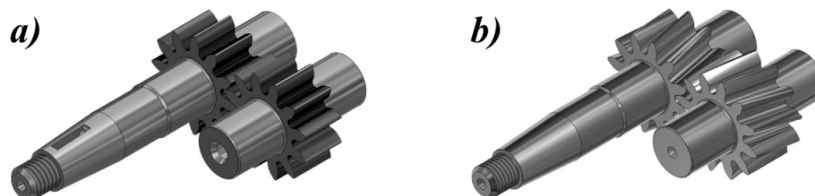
a) Spur gears design (SPUR); b) Helical gears design (HEL).
